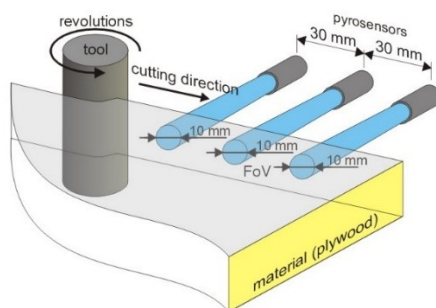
Schematic model of non-contact temperature measurement in the tool–workpiece interaction zone during CNC machining
